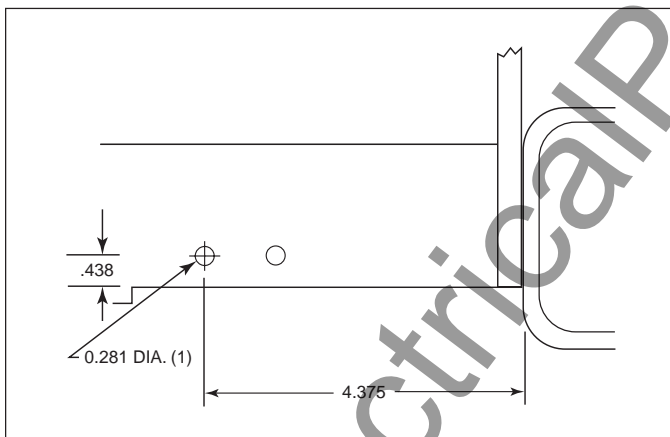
Drilling Plan "B" (For LAF-1600 C Breakers).
